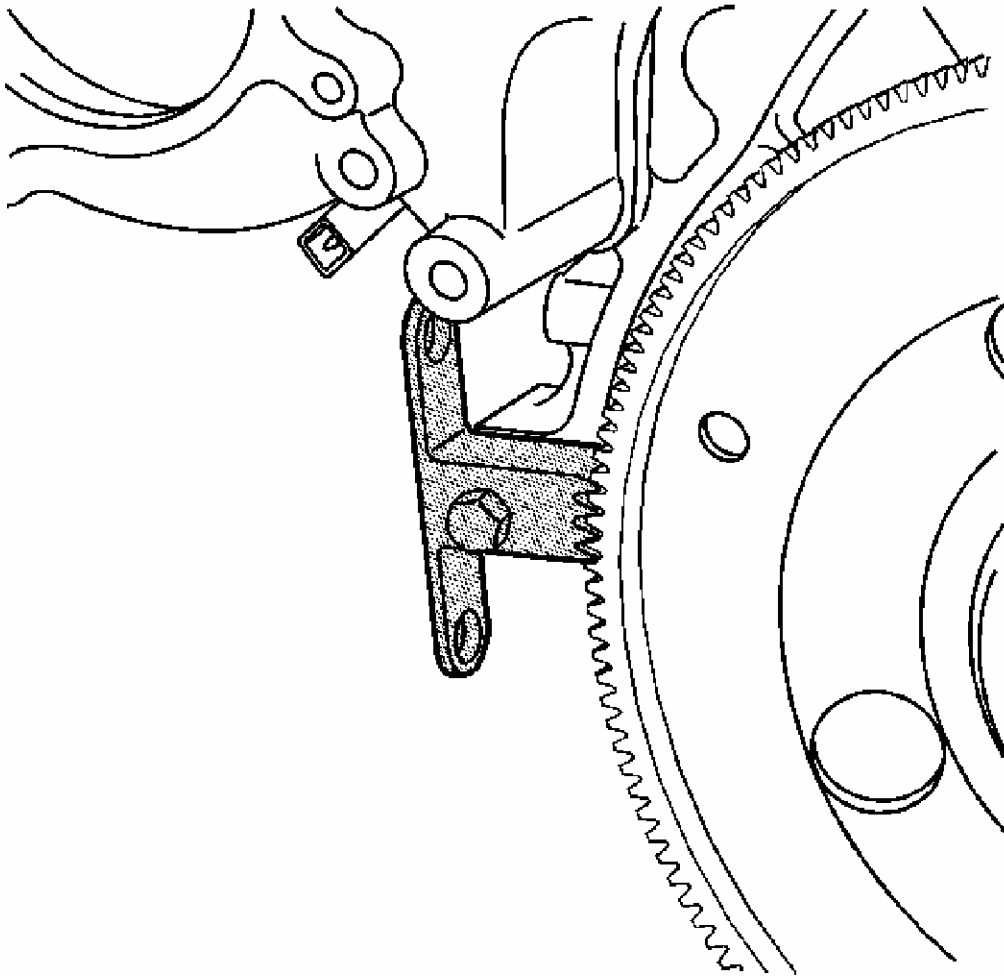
View of J 44214 Holding Flywheel Ring Gear
